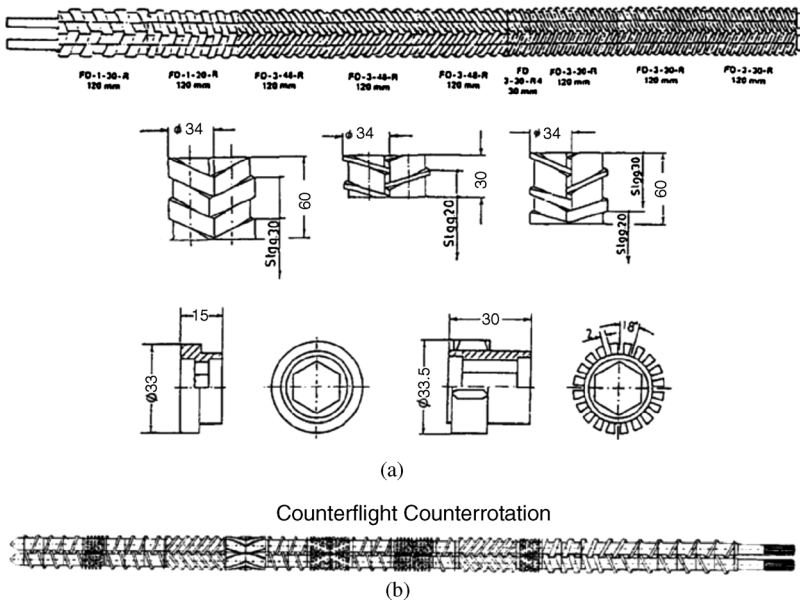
Leistritz modular intermeshing counter-rotating twin-screw extruders [120–124]: (a) Tenner GG machine; (b) Thiele counter flight machine.
